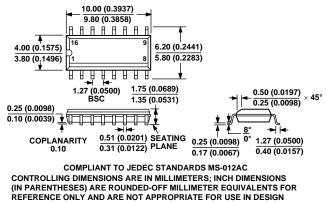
16-Lead Standard Small Outline Package [SOIC] (R-16) Dimensions shown in millimeters and (inches)
